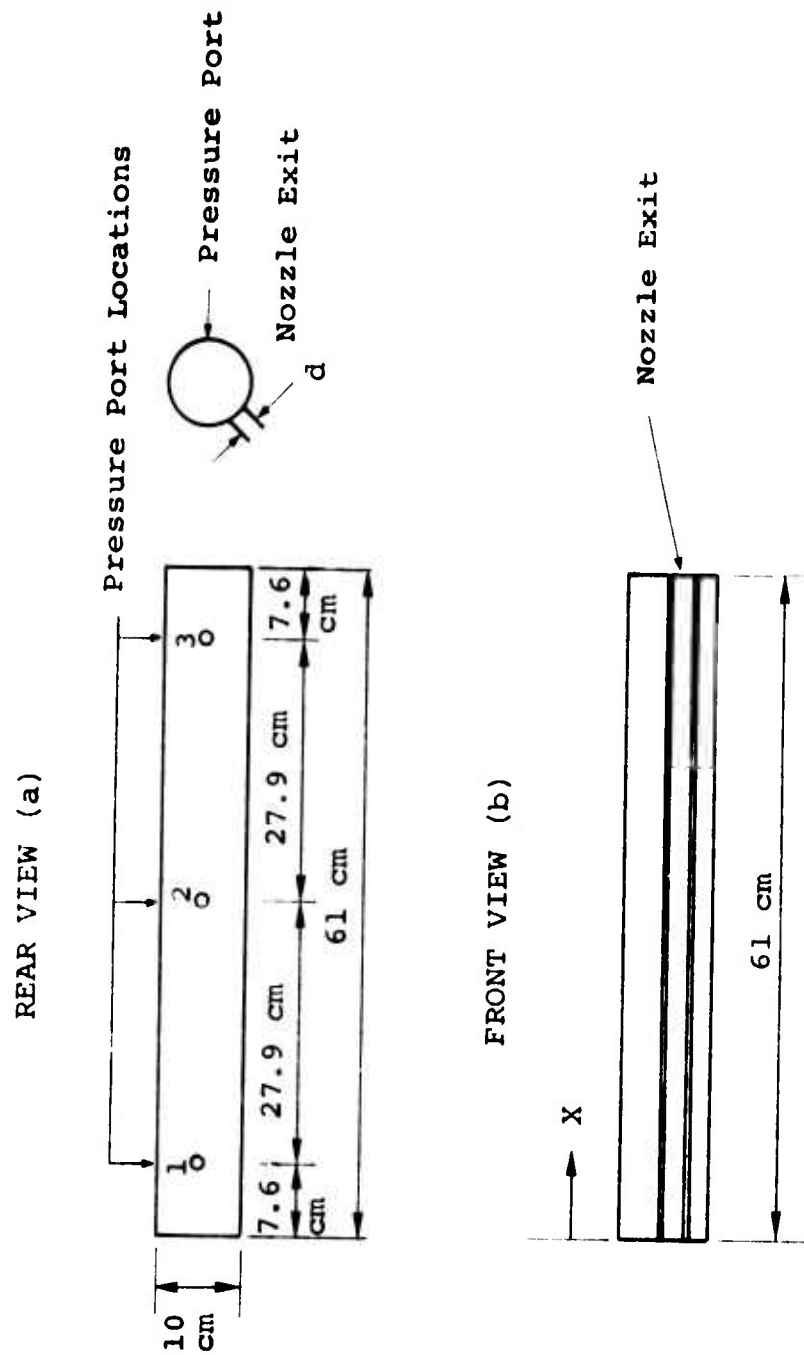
MANIFOLD AIR JET (a) REAR VIEW AND (b) FRONT VIEW
